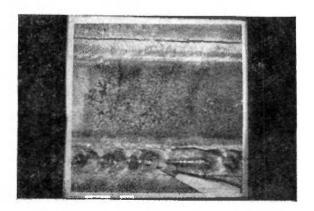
Weld made with 50 gauss external field on Hy-80 steel
